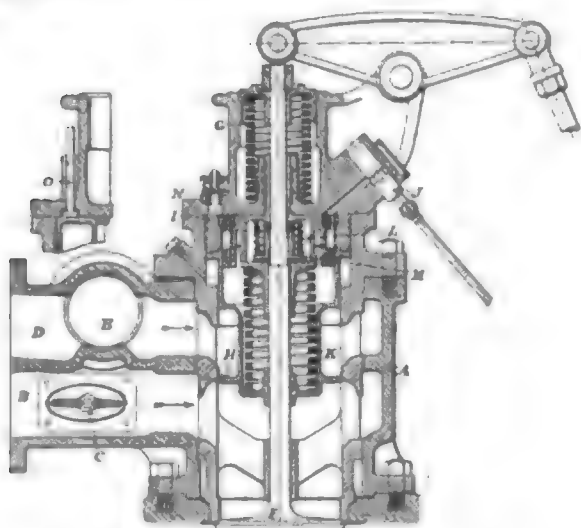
THE CROSSLEY GOVERNING GEAR.
